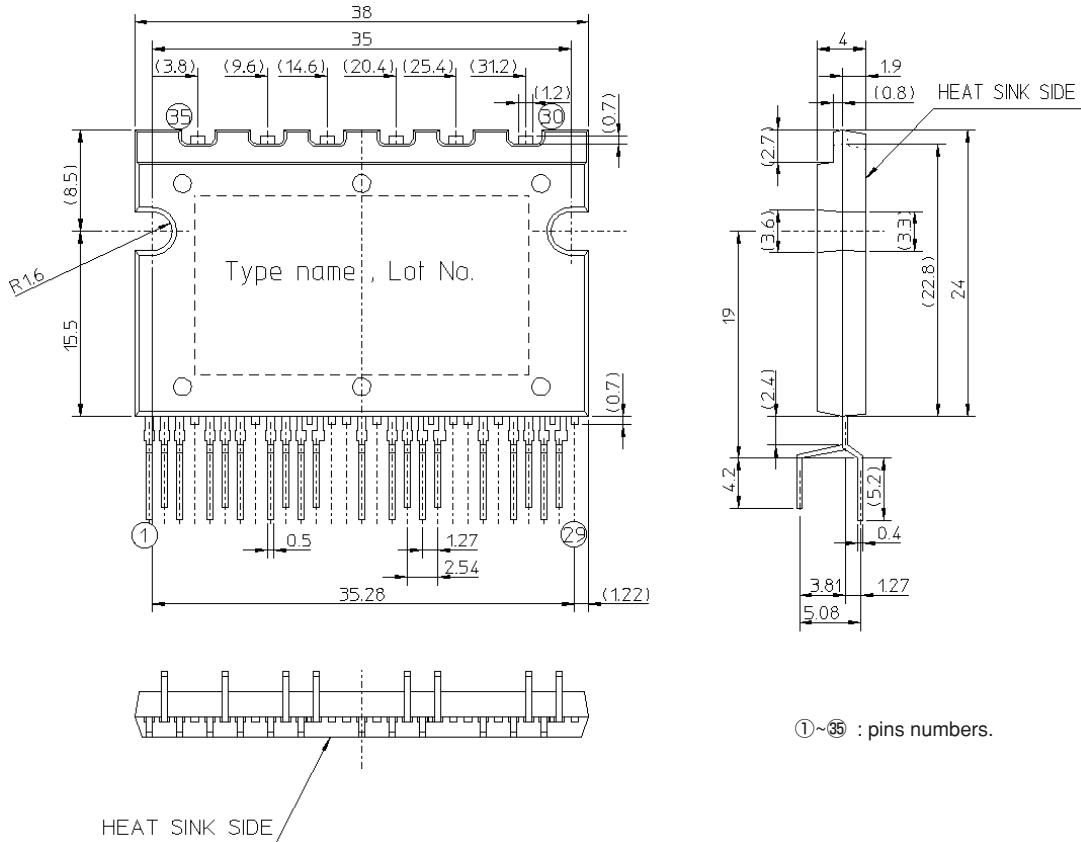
PS21661-RZ PACKAGE OUTLINES
